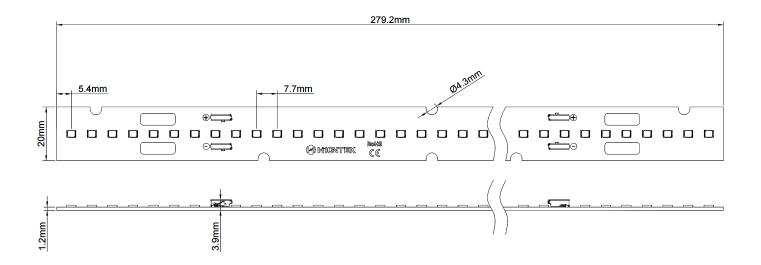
Mechanical Dimensions for HIGNTEK HUL-280SA-036036.
